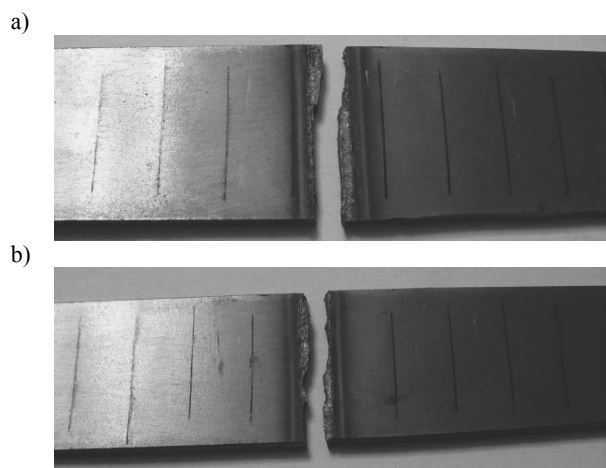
A view of the samples after tensile test of the titanium alloy Ti6Al4V butt joints 2.0 mm thick laser welded with the Disk laser, Table 6; a) joint no. W3, b) joint no. W6
